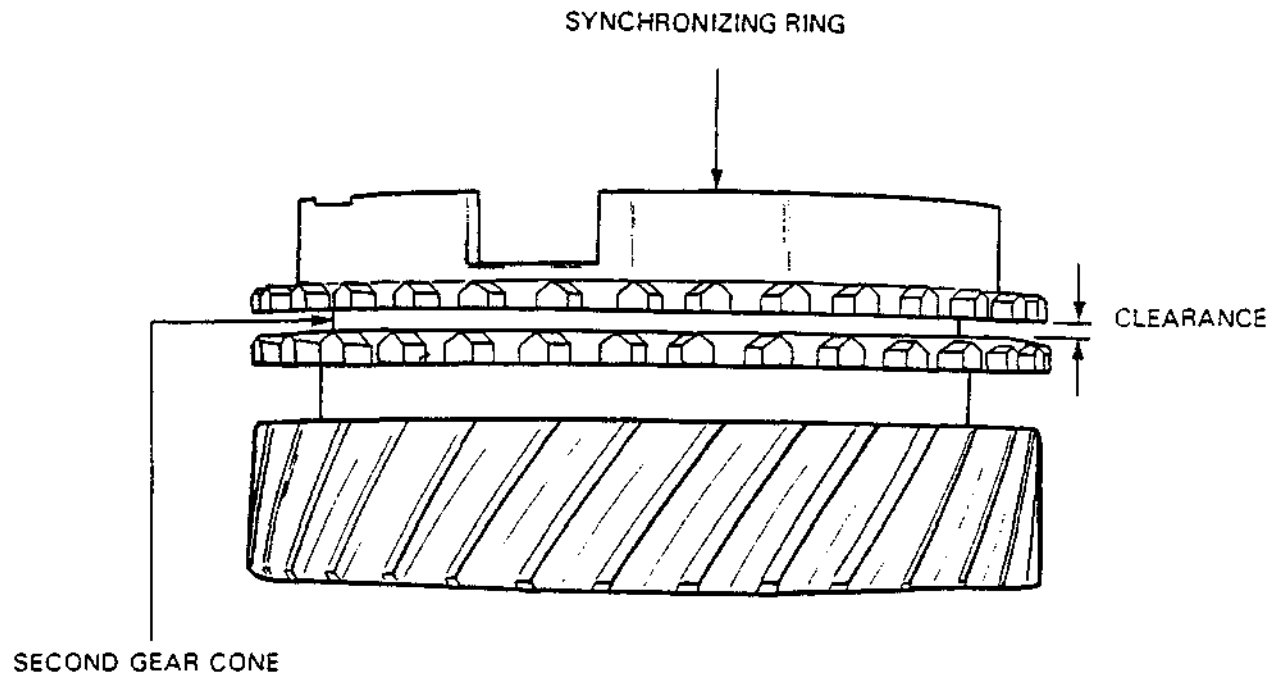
Clearance Between Synchronizing Ring and Gear Cone
